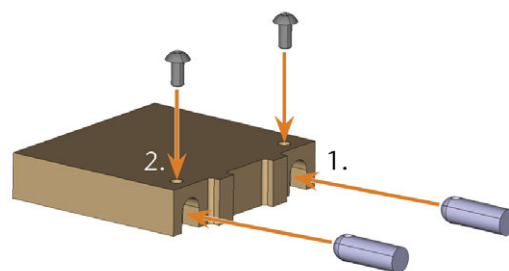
INSERTING AND SCREWING DOWN THE SHAFTS
